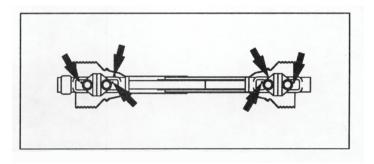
DRIVE SHAFT (VERTICAL SHAFT)
